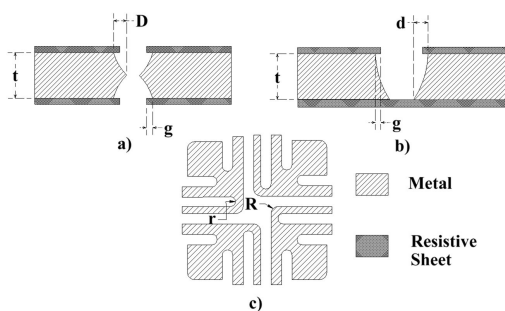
a) Cross sectional view of a prototyped metal sheet using two-sided PCM. b) Cross sectional view of a prototyped metal sheet using one-sided PCM. c) Front view of the unit cell after etching using PCM.
